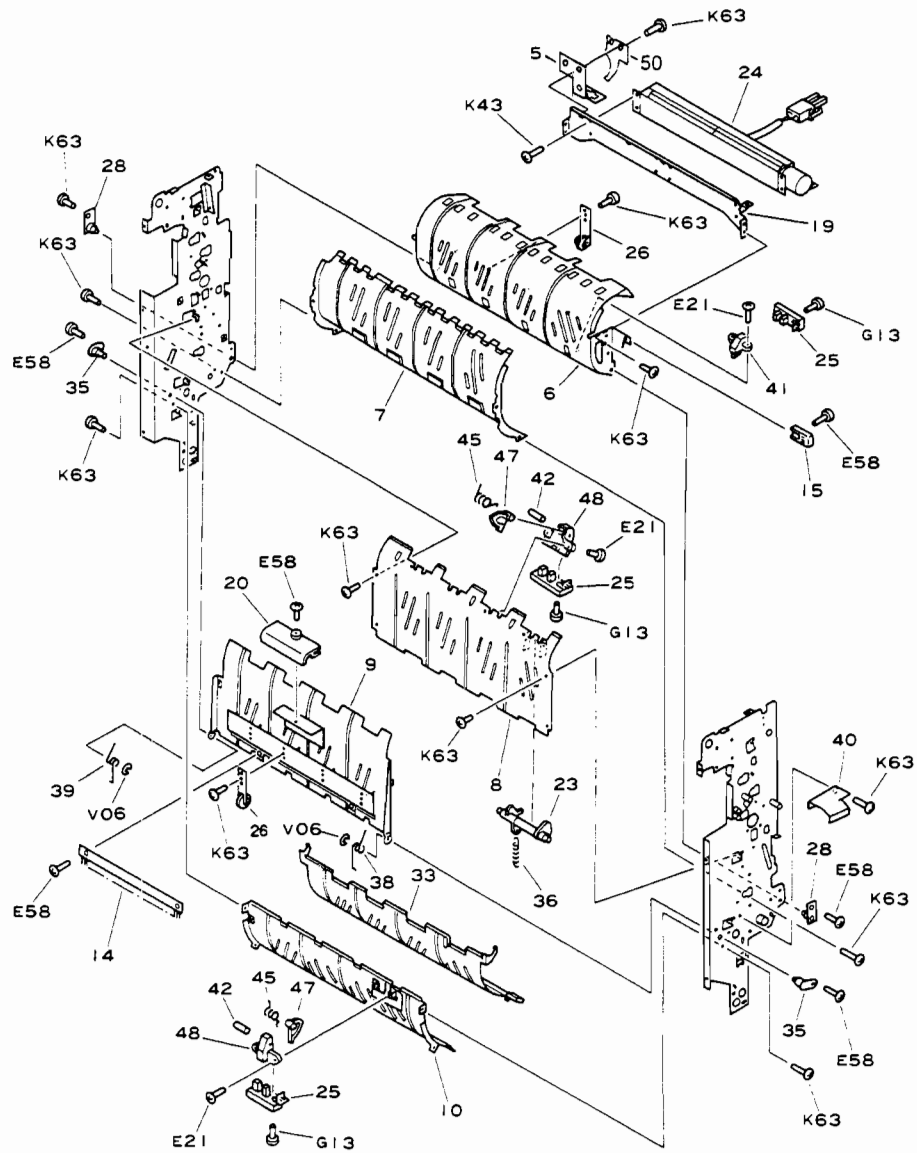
9. Switchback Feeder Assembly 1 (2 of 2)
